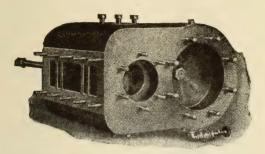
VALVE CHEST WITH COVER REMOVED.
